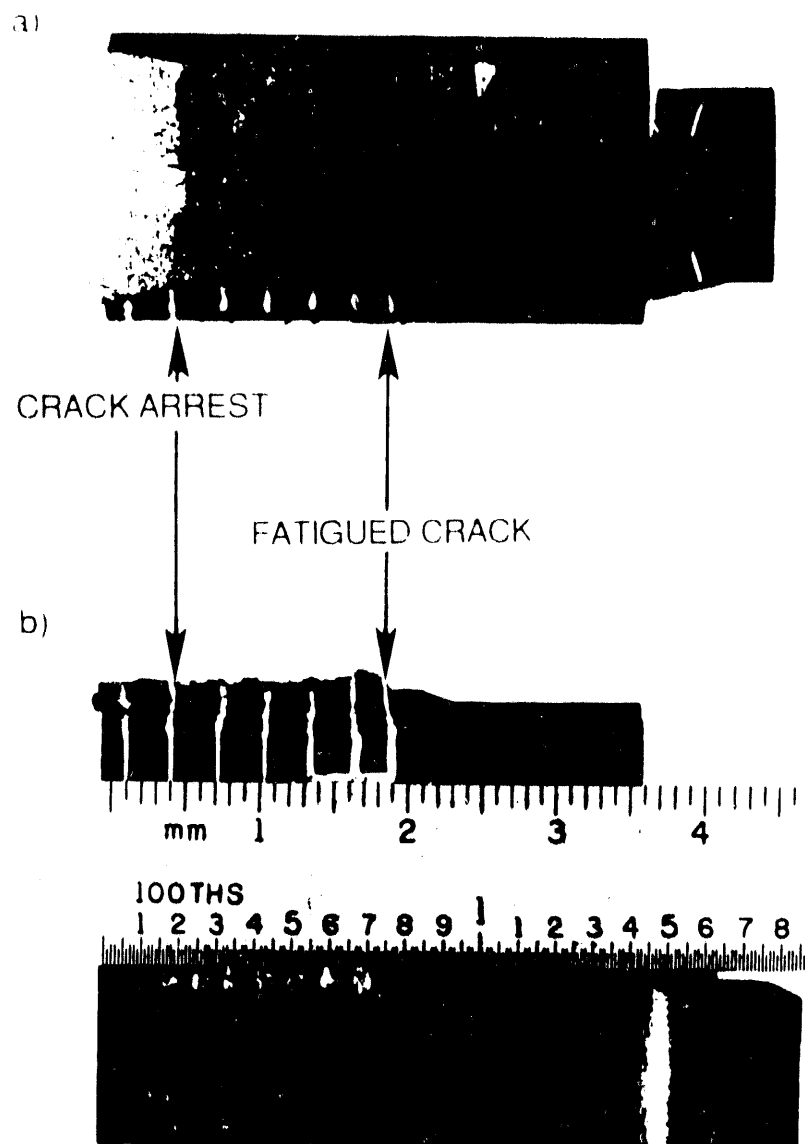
A533B specimen tested at 100°C: a) fracture surface, b) crack profile.
